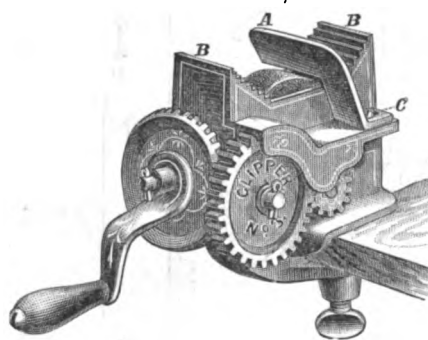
No. 3 Clipper Grinder, with Attachment for Grinding Scissors.
